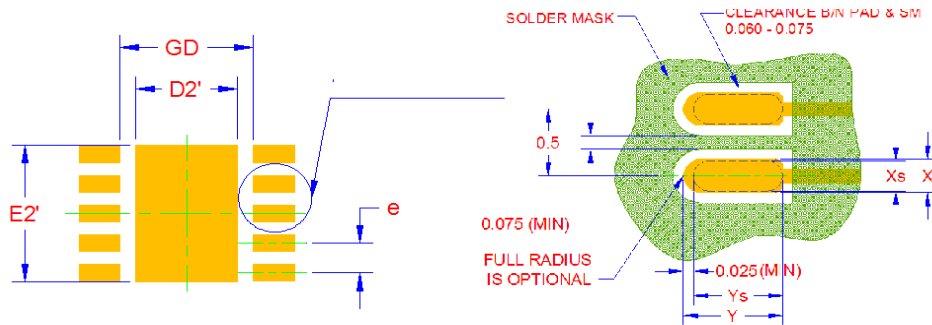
10-Pin DFN 3mm x 3mm Package Drawing
